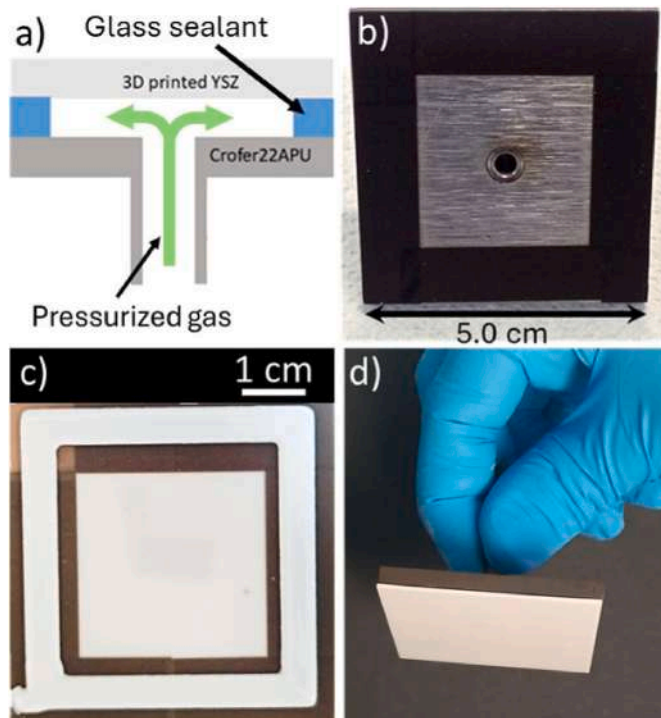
(a) Schematic view of the differential pressure test. (b) Digital image of the lasered Crofer 22APU plate with the welded tube. (c) Digital image of the deposition by robocasting of the glass-based sealant on the lasered 3YSZ 5 × 5 cm plate. (d) Digital image of the joined 5 × 5 cm Crofer22APU and 5 × 5 cm 3YSZ.
